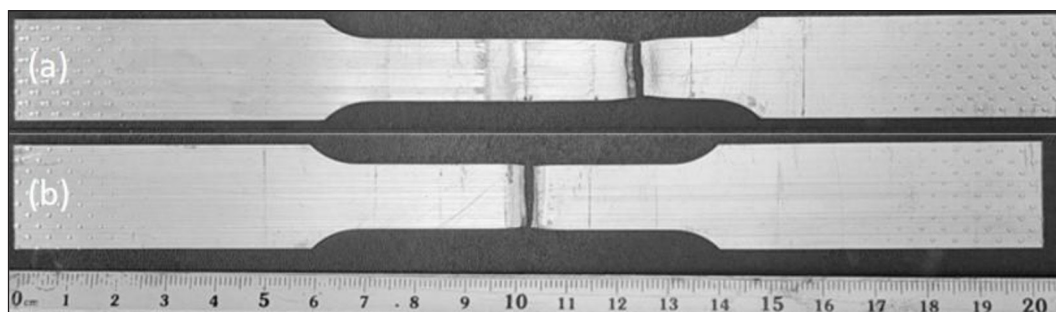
Tensile fracture morphology of T0 specimens: (a) skin, (b) fin
